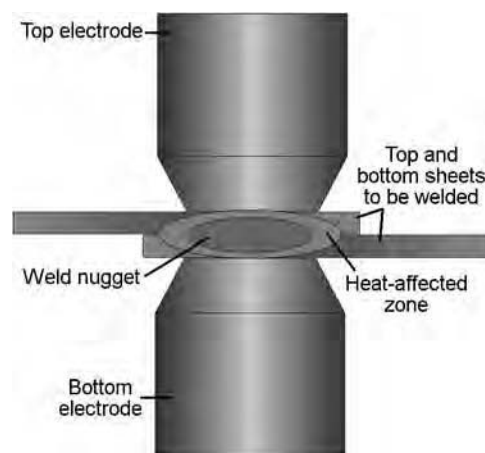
Cross-sectional sketch of resistance spot welding of two sheets
